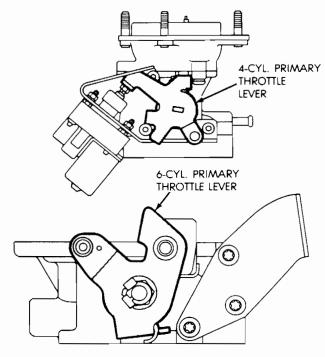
Rotate Primary Throttle Lever To Wide Open Position
